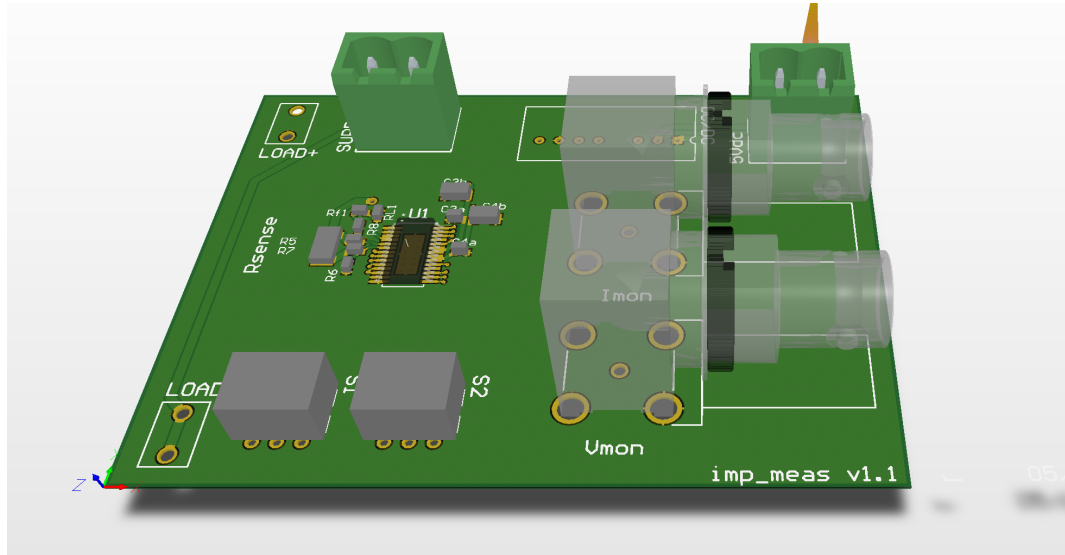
The PCB layouts of the designed measurement circuit in 3D view
